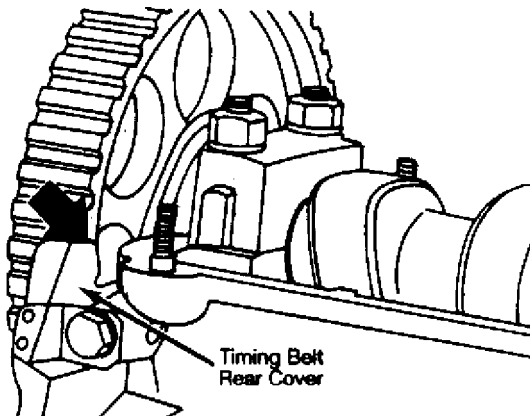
Camshaft Sprocket Positioning (Gasoline)
